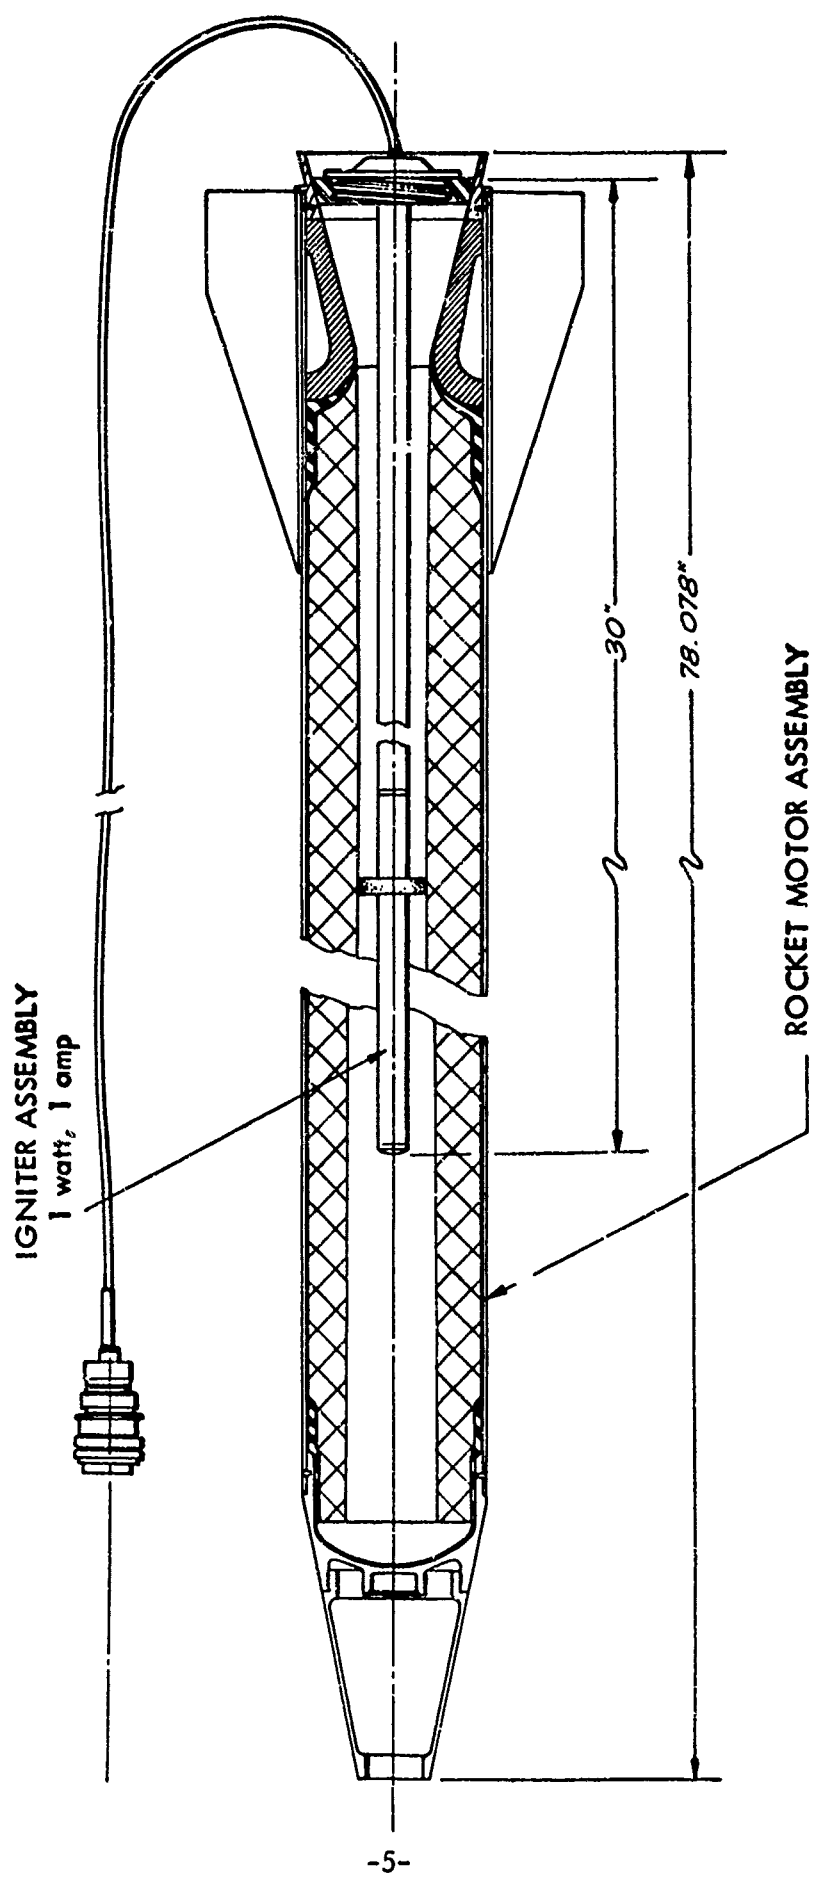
CROSS-SECTION VIEW OF SUPER LOKI ROCKET MOTOR WITH IGNITER INSTALLED
